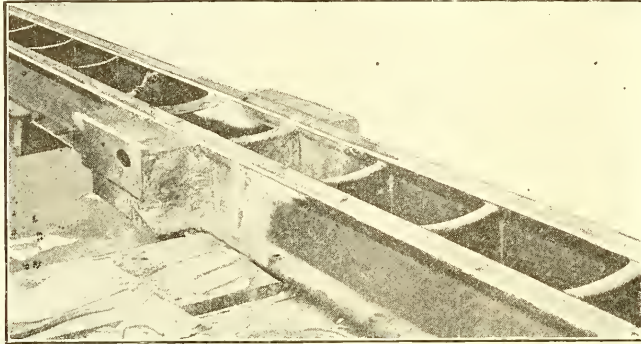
Weld on Large Planing-Machine Bed.
